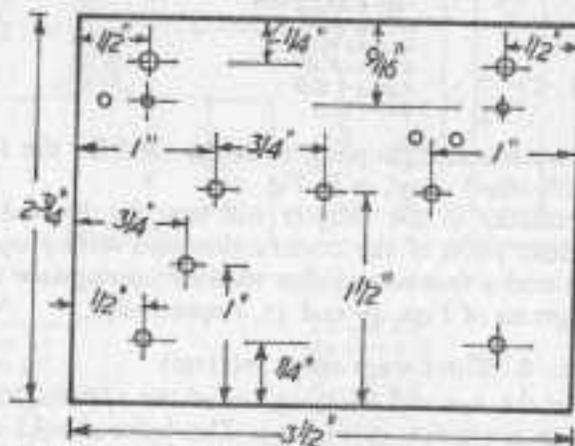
CHASSIS SIZE AND DRILLING POSITION FOR DESIGN NO. 8 OR DESIGN NO. 9.
